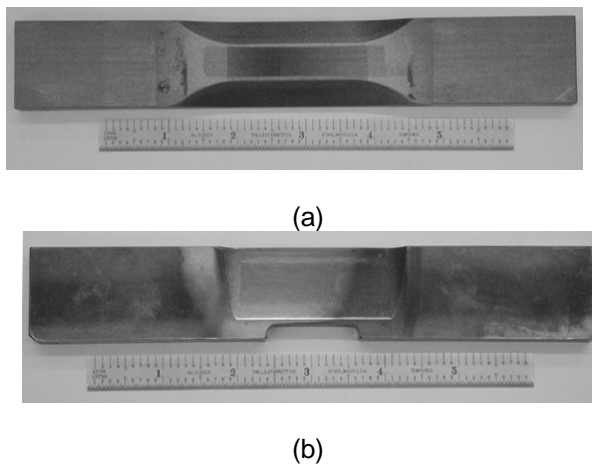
Photographs of LPB processed (a) thick section specimen, and (b) blade-edge specimen.
